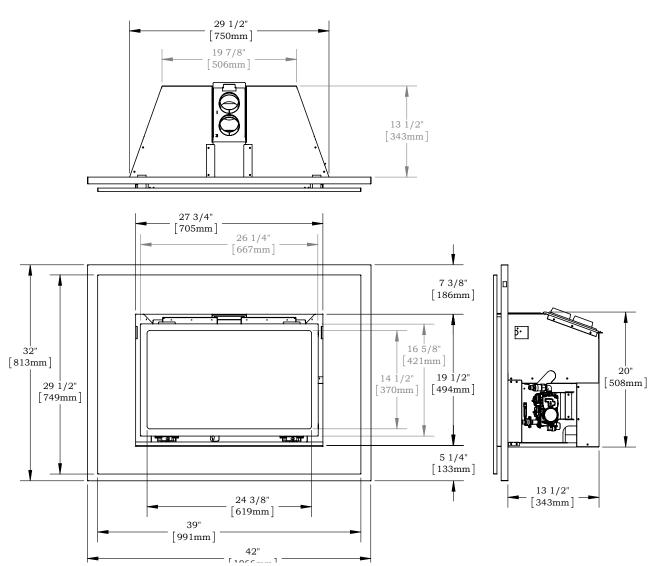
Sec.1 30DFID-S four-sided trim dimensions (Tolerance $\pm \frac{1}{8}$ ") [1.25 mm]
